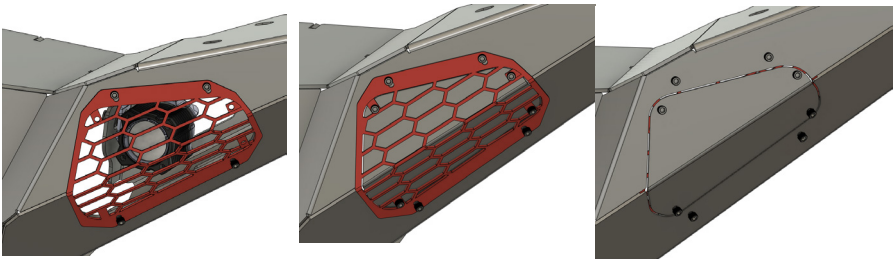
Mount Hole Covers to Light Bar Covers using 9/64" Allen and 11/32" Wrench
